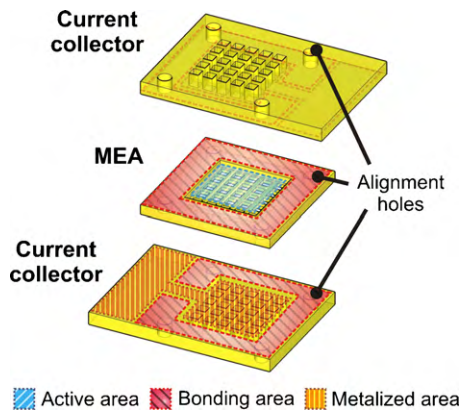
Exploded view of SU-8 micro-fuel cell components with main parts identified.
